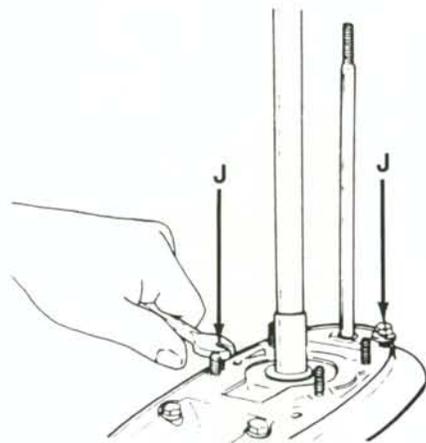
Use two 6 mm jackscrews (J) to withdraw upper bearing housing with drive shaft components.
